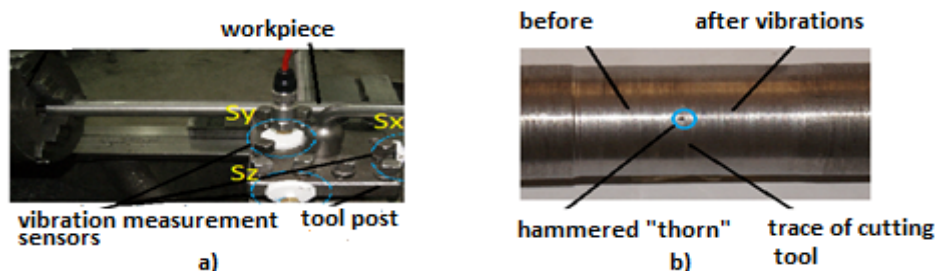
a) mounted sensors for measurement, b) characteristic parts of the workpiece
